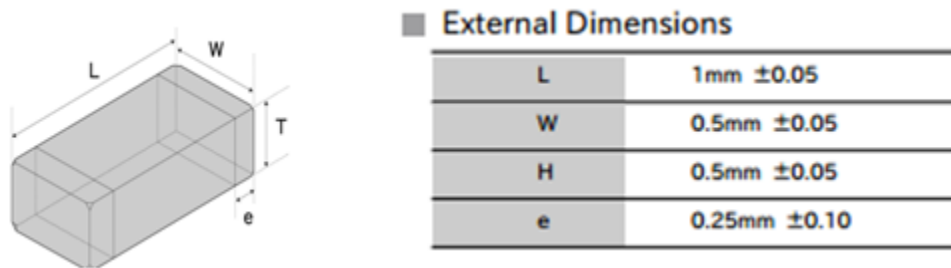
Multilayer Chip Inductor - 0402 package dimensions [52]
